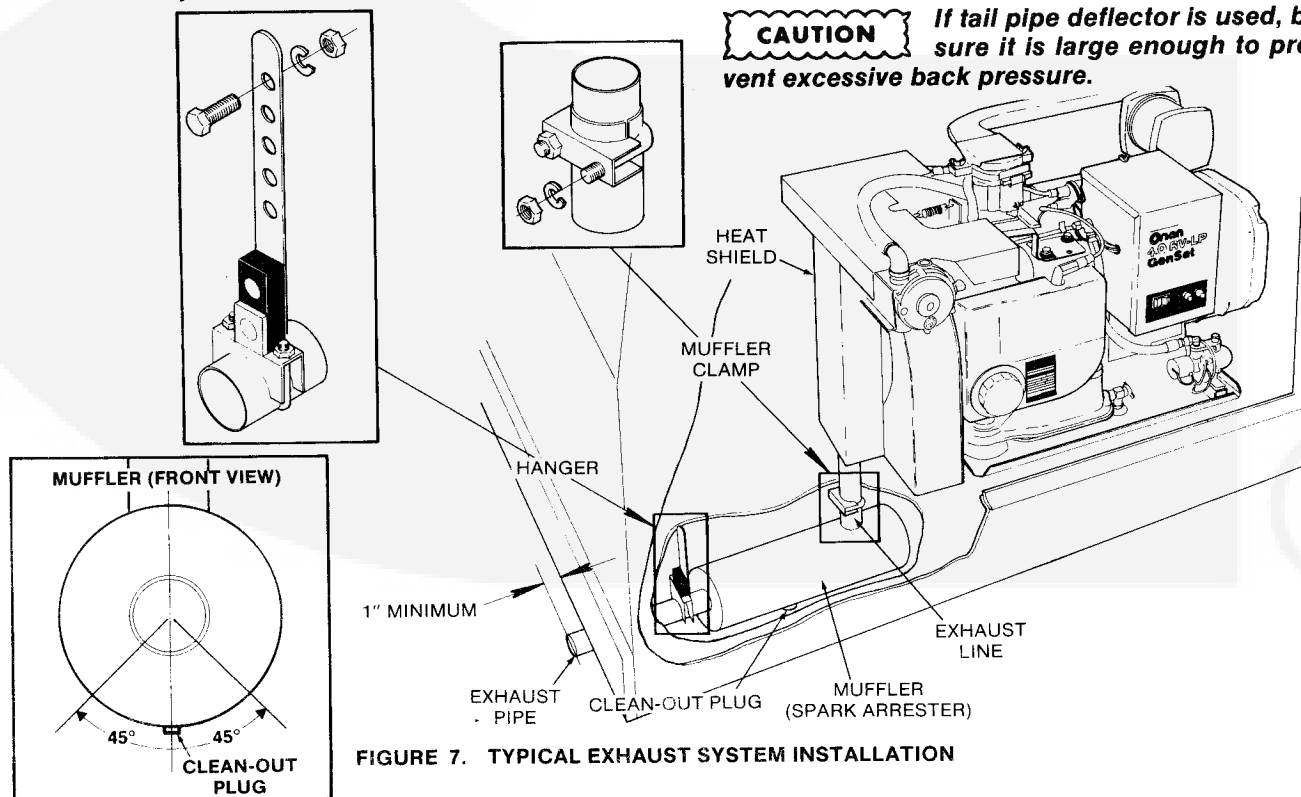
TYPICAL EXHAUST SYSTEM INSTALLATION
